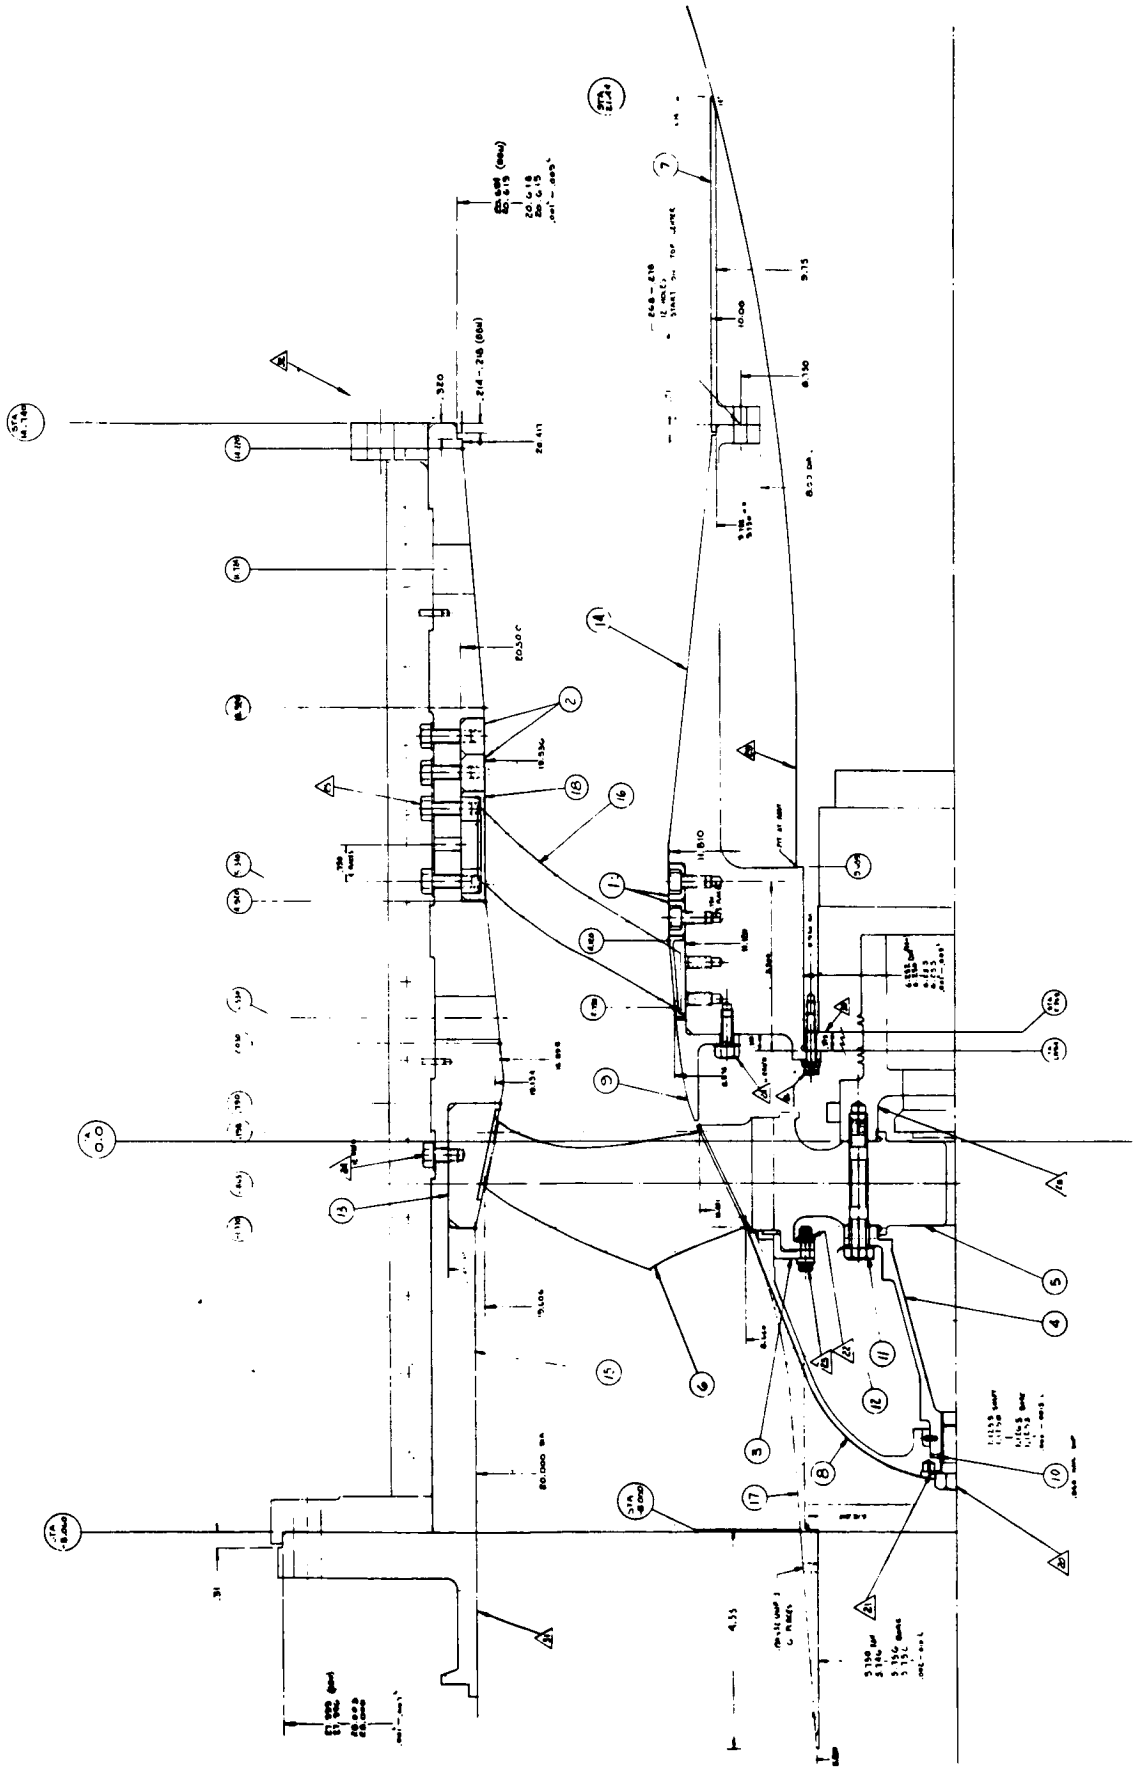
DETAILED CROSS-SECTION OF FAN RIG.
